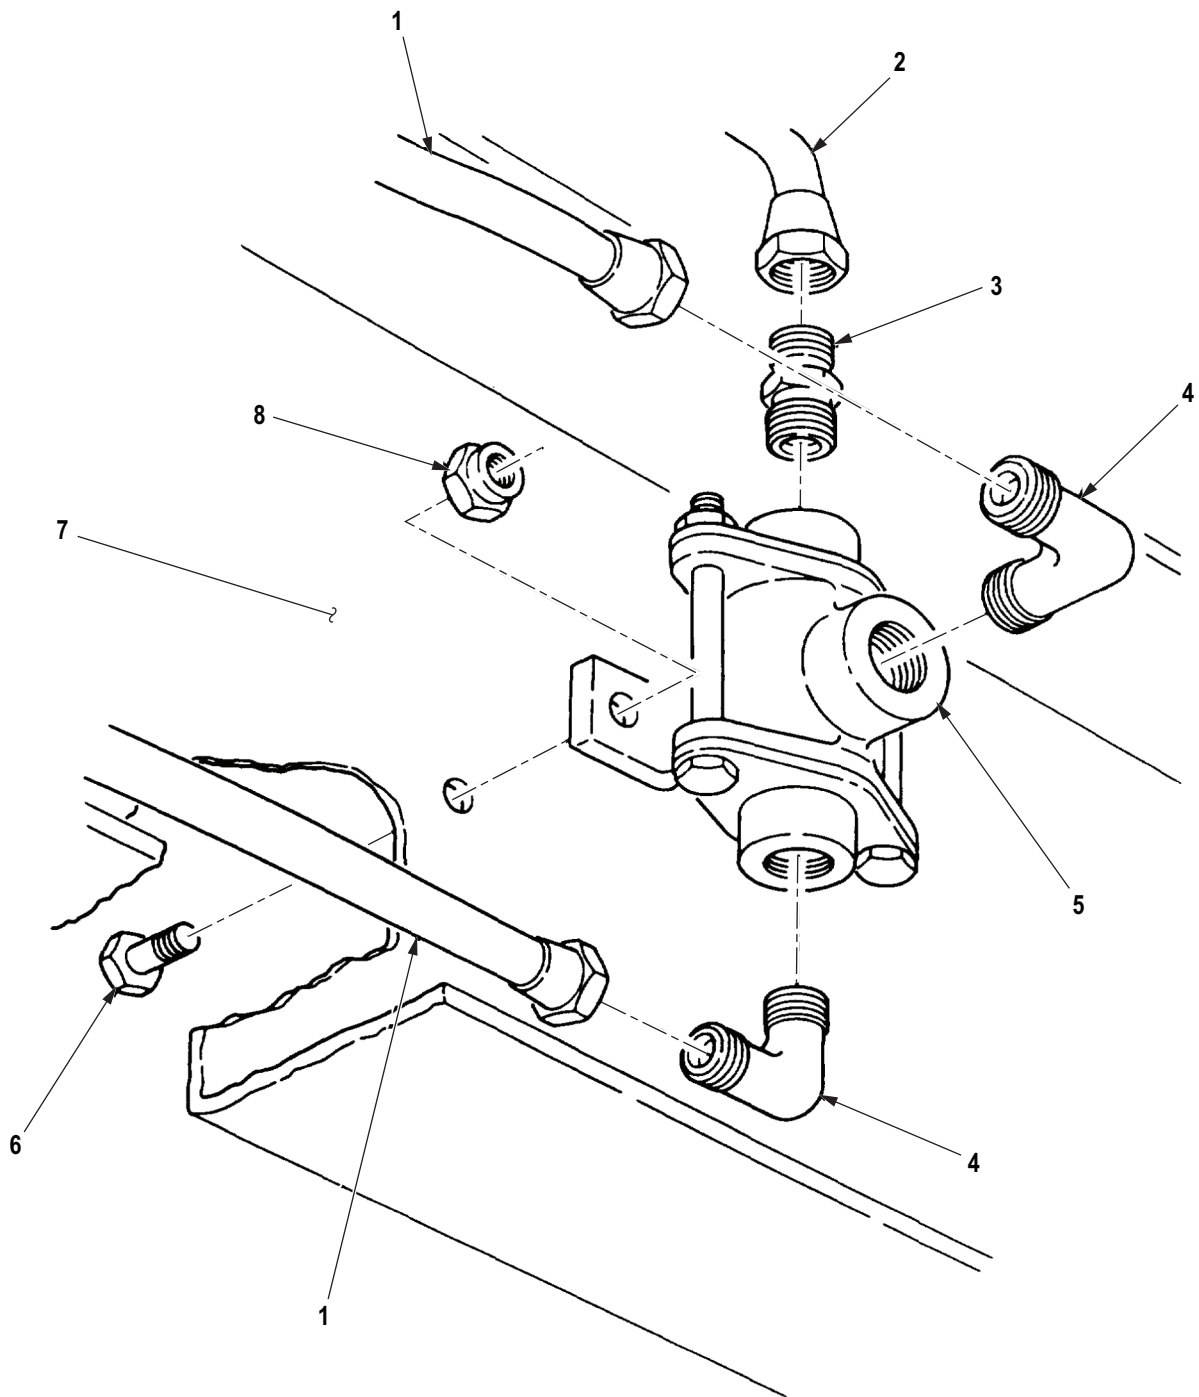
Rear-Rear Axle Double Check Valve Removal.
